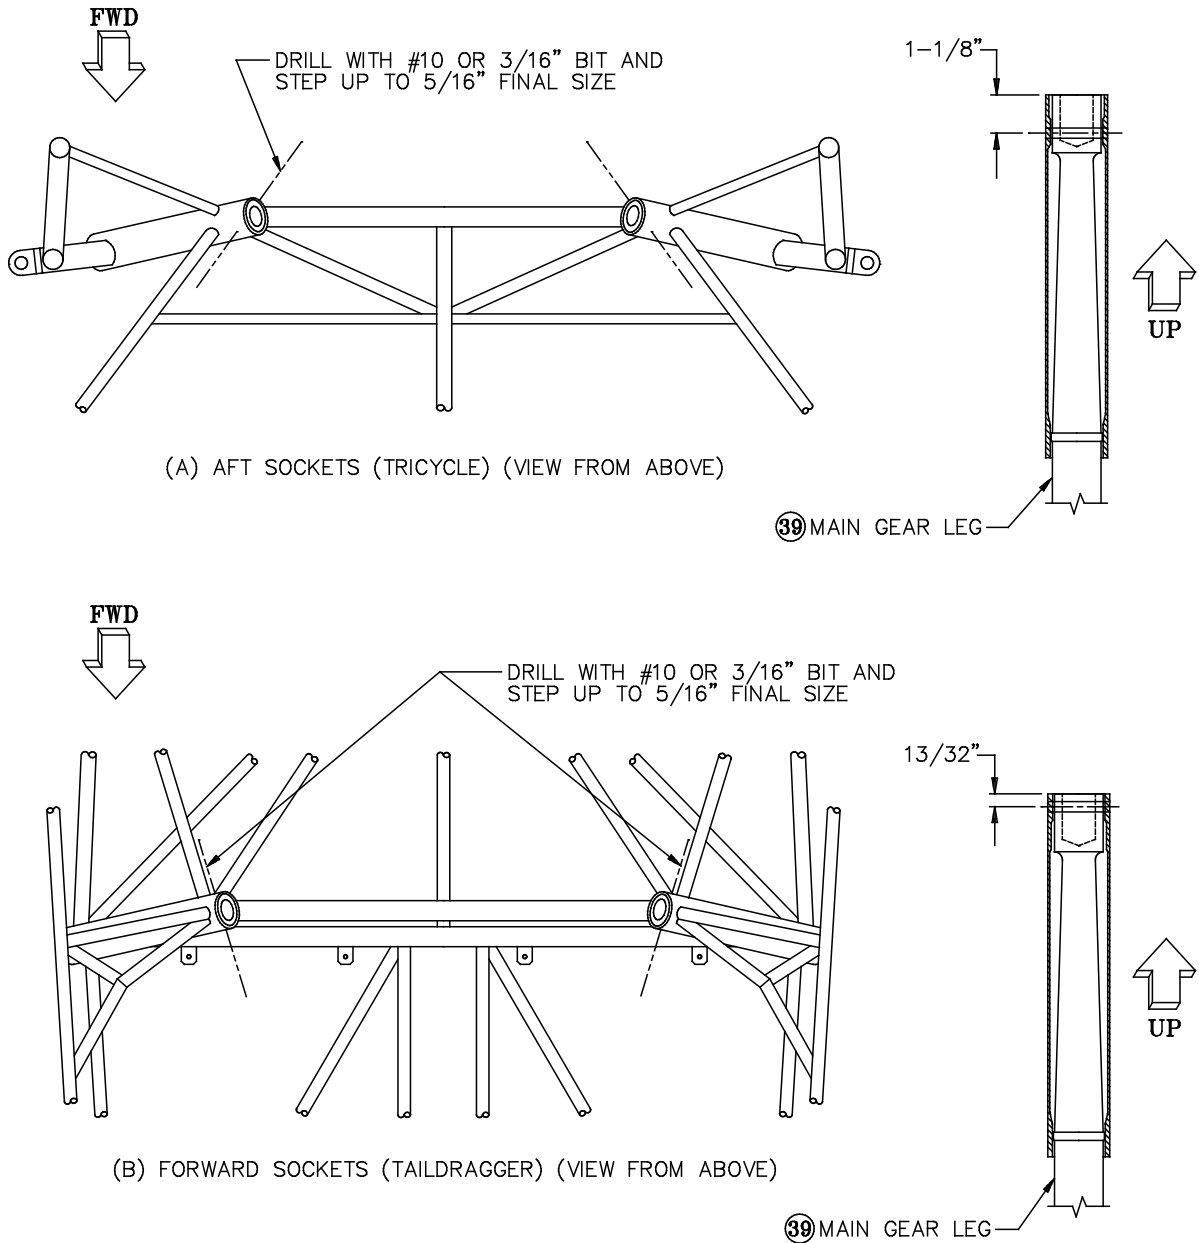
Drilling Angles for the Main Gear Leg Bolts
